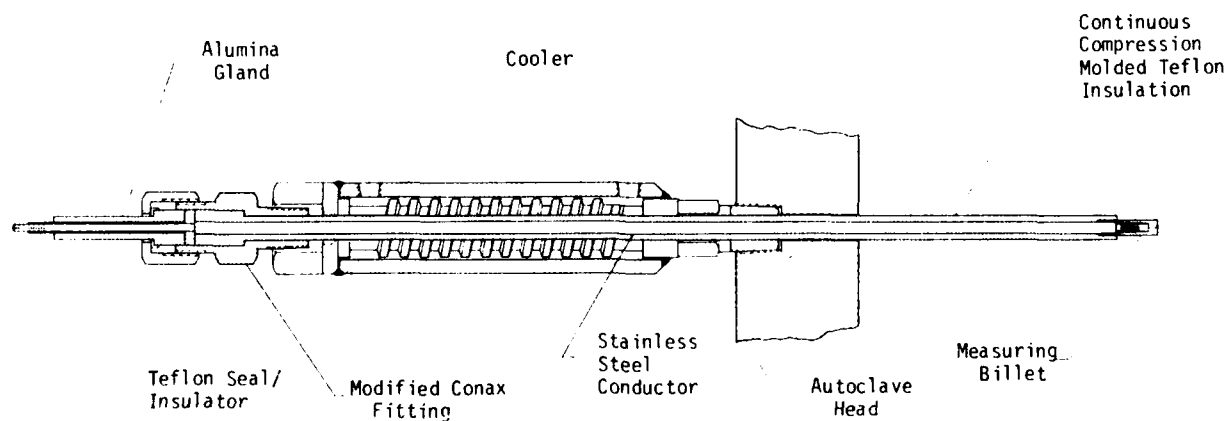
Cooled-Seal Measuring Electrode Assembly<sup>(6,7)</sup>
